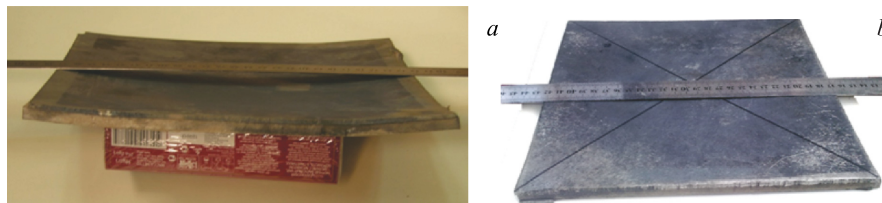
Appearance of the billet after explosion welding: *a*) before planishing, *b*) after planishing
